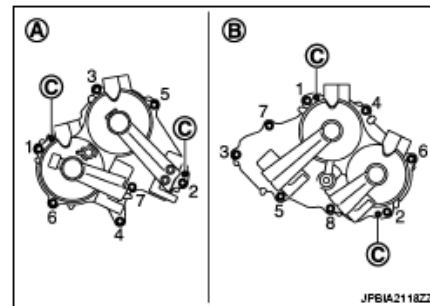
Identifying Timing Control Cover Mounting Bolts Loosening Sequence
